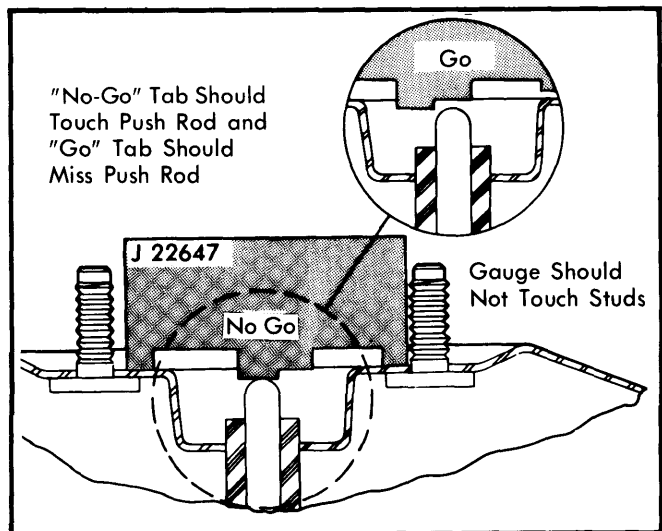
Using "Go/No-Go" Push Rod Gauge to Measure Height of Push Rod
